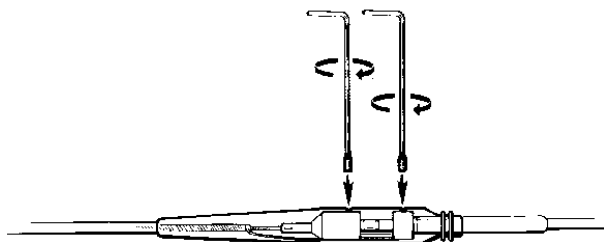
Turn the setscrews into the threaded holes on the adaptor
